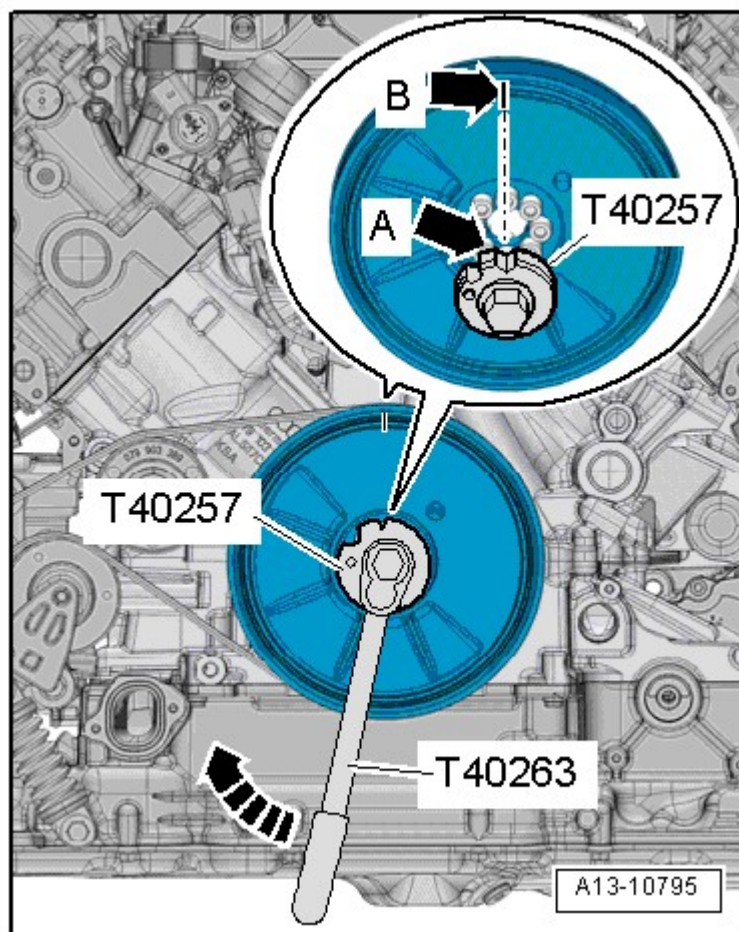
Turning Crankshaft 180 Degrees In Direction Of Engine Rotation
